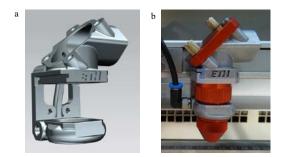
Feasible-design (a) and additive manufactured part with assembled components (b)
